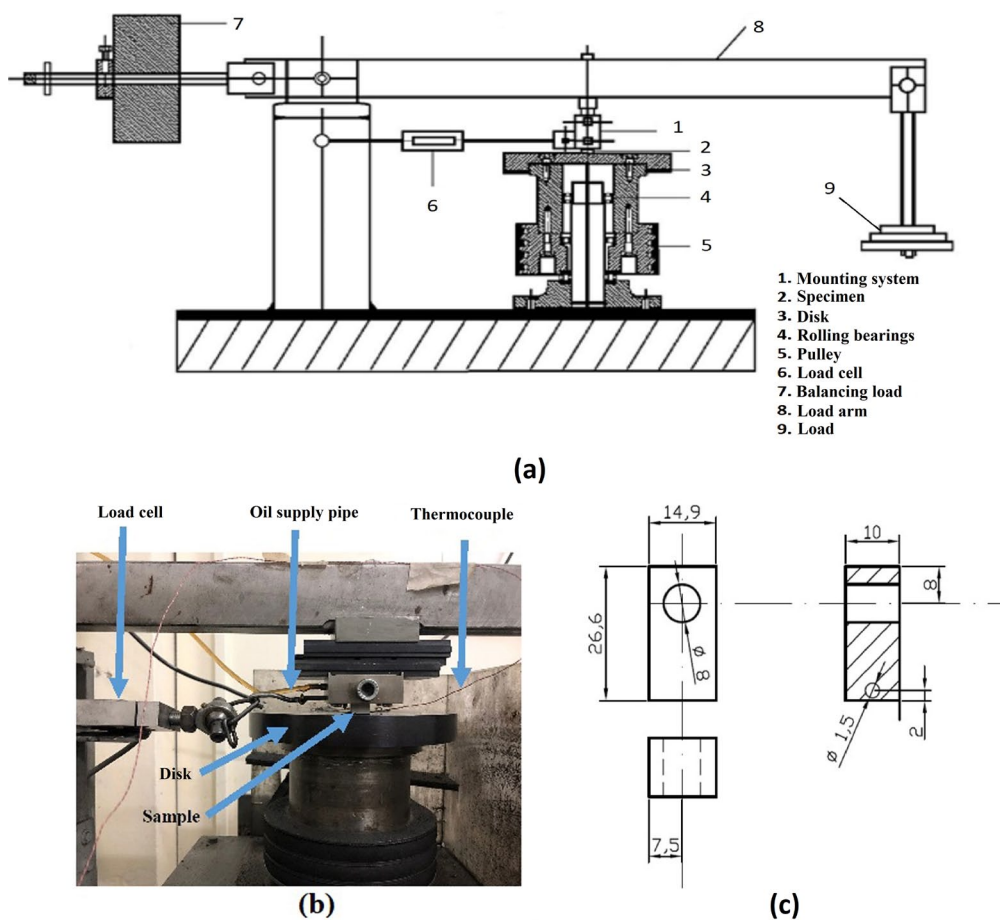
(a) Schematic illustration and (b) close up view of the wear test machine, and (c) technical drawing of the wear test sample
